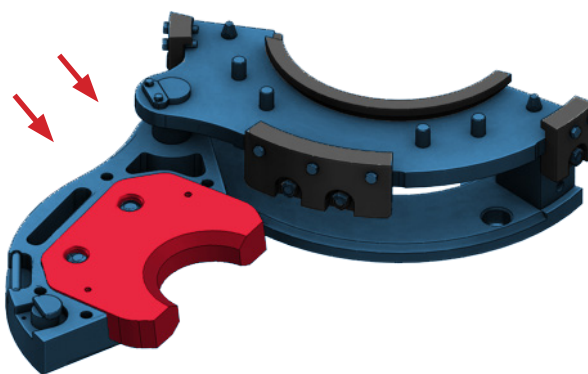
Screw in PS 1250 BGA guide plate eye bolts
